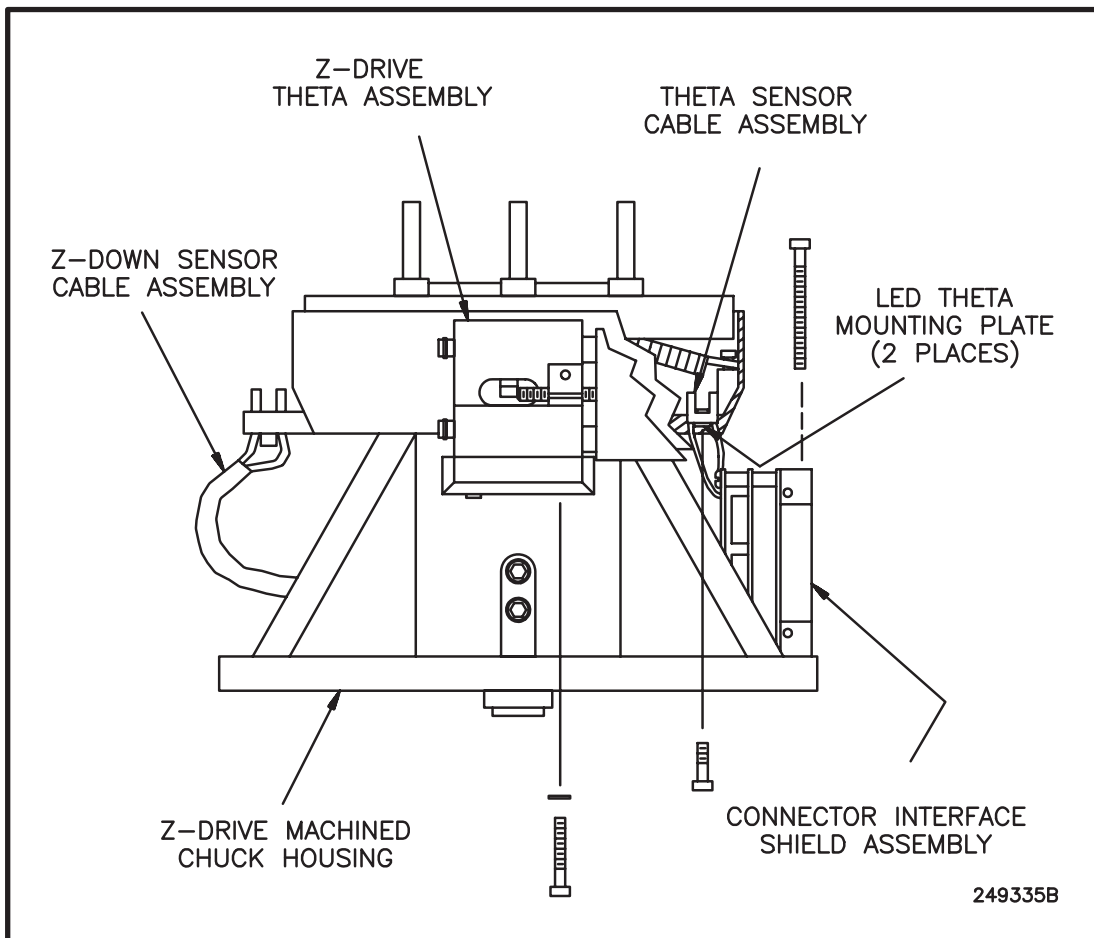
A: ASSEMBLY DETAIL – SIDE VIEW
